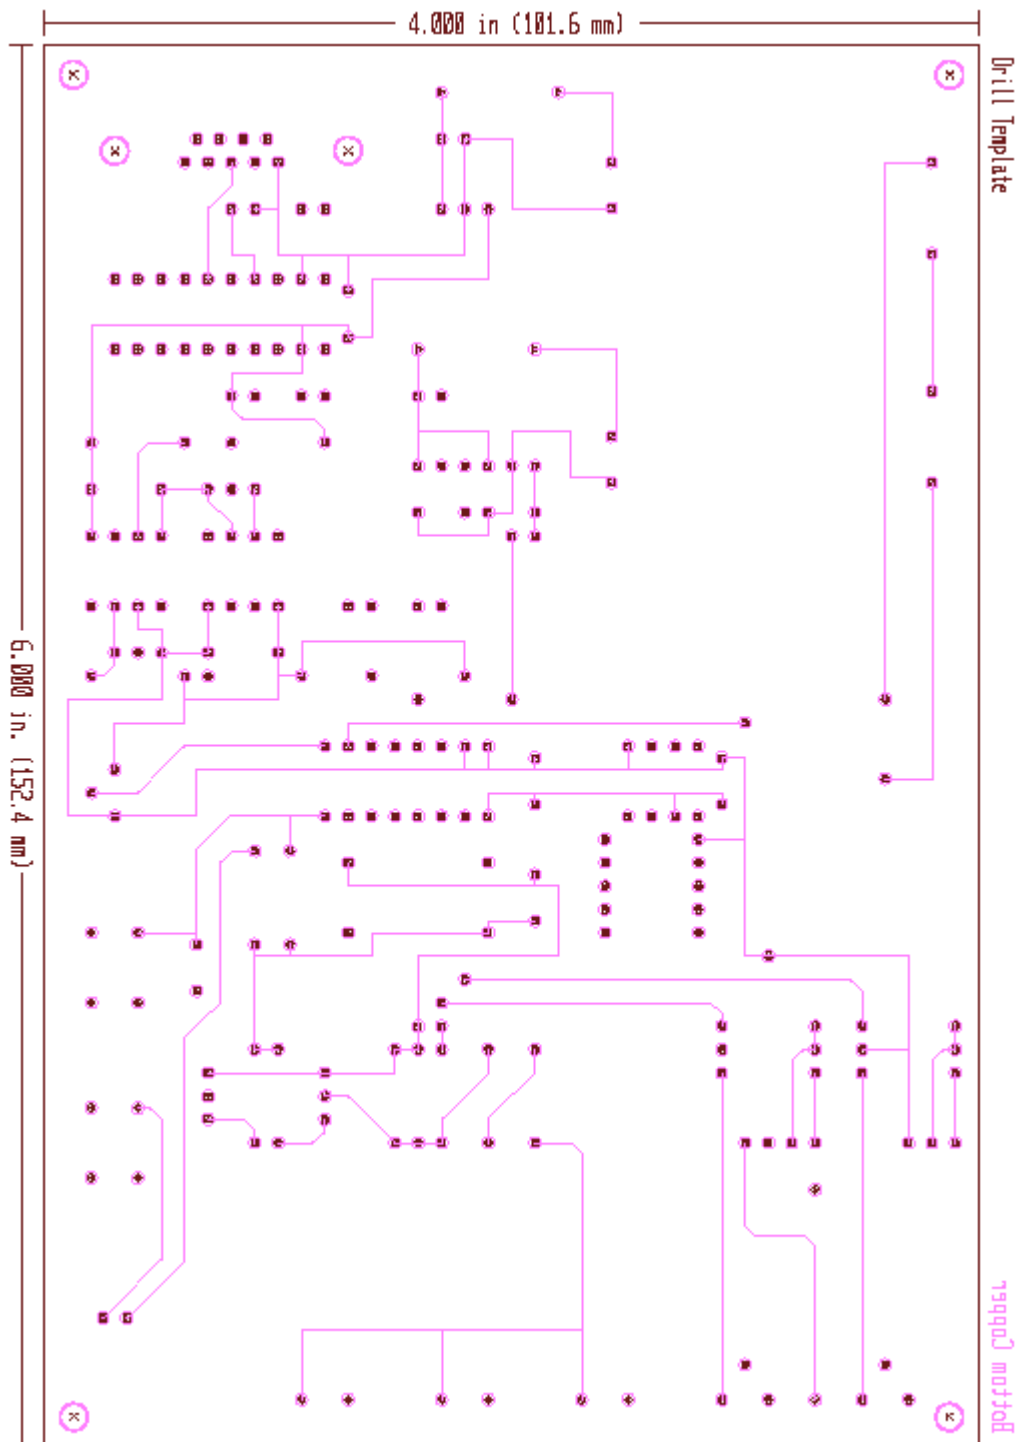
HC908KX6 Universal Motor Development System (bottom)
